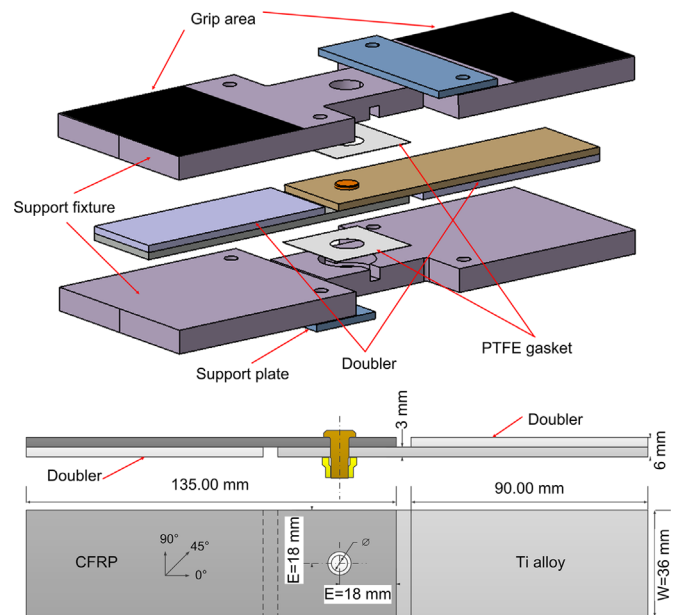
Geometry and dimensions of the CFRP/Ti single-lap joint.
